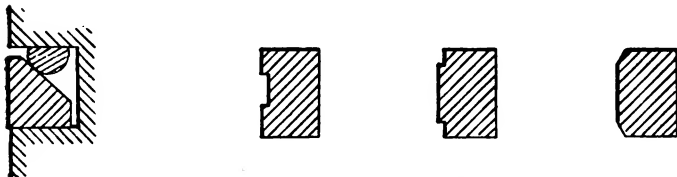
EXAMPLES OF TYPICAL PISTON-RING CONSTRUCTION
